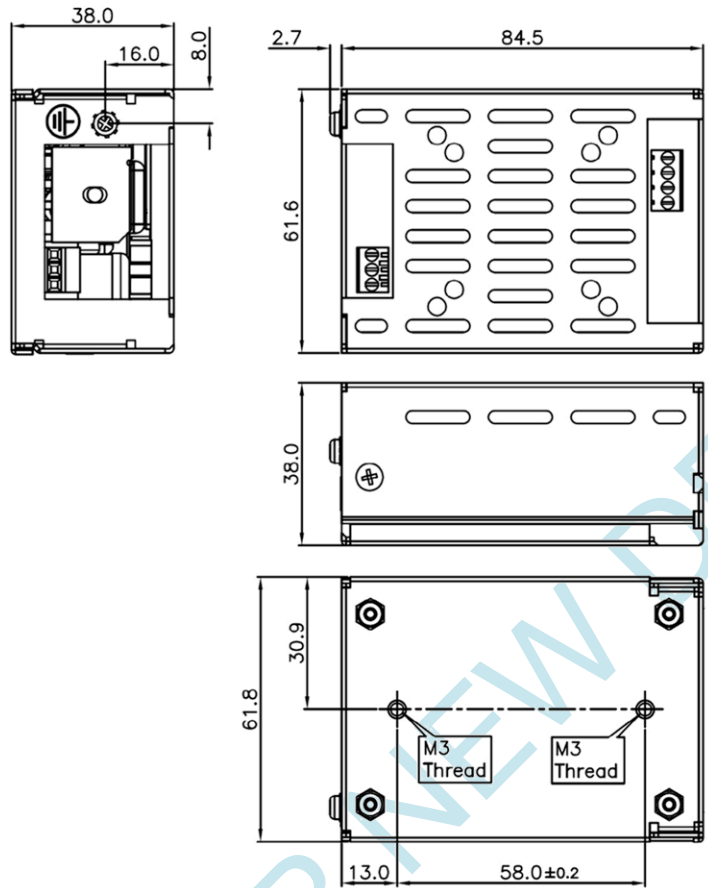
Mechanical Drawing - Molex Header (Option 2)
